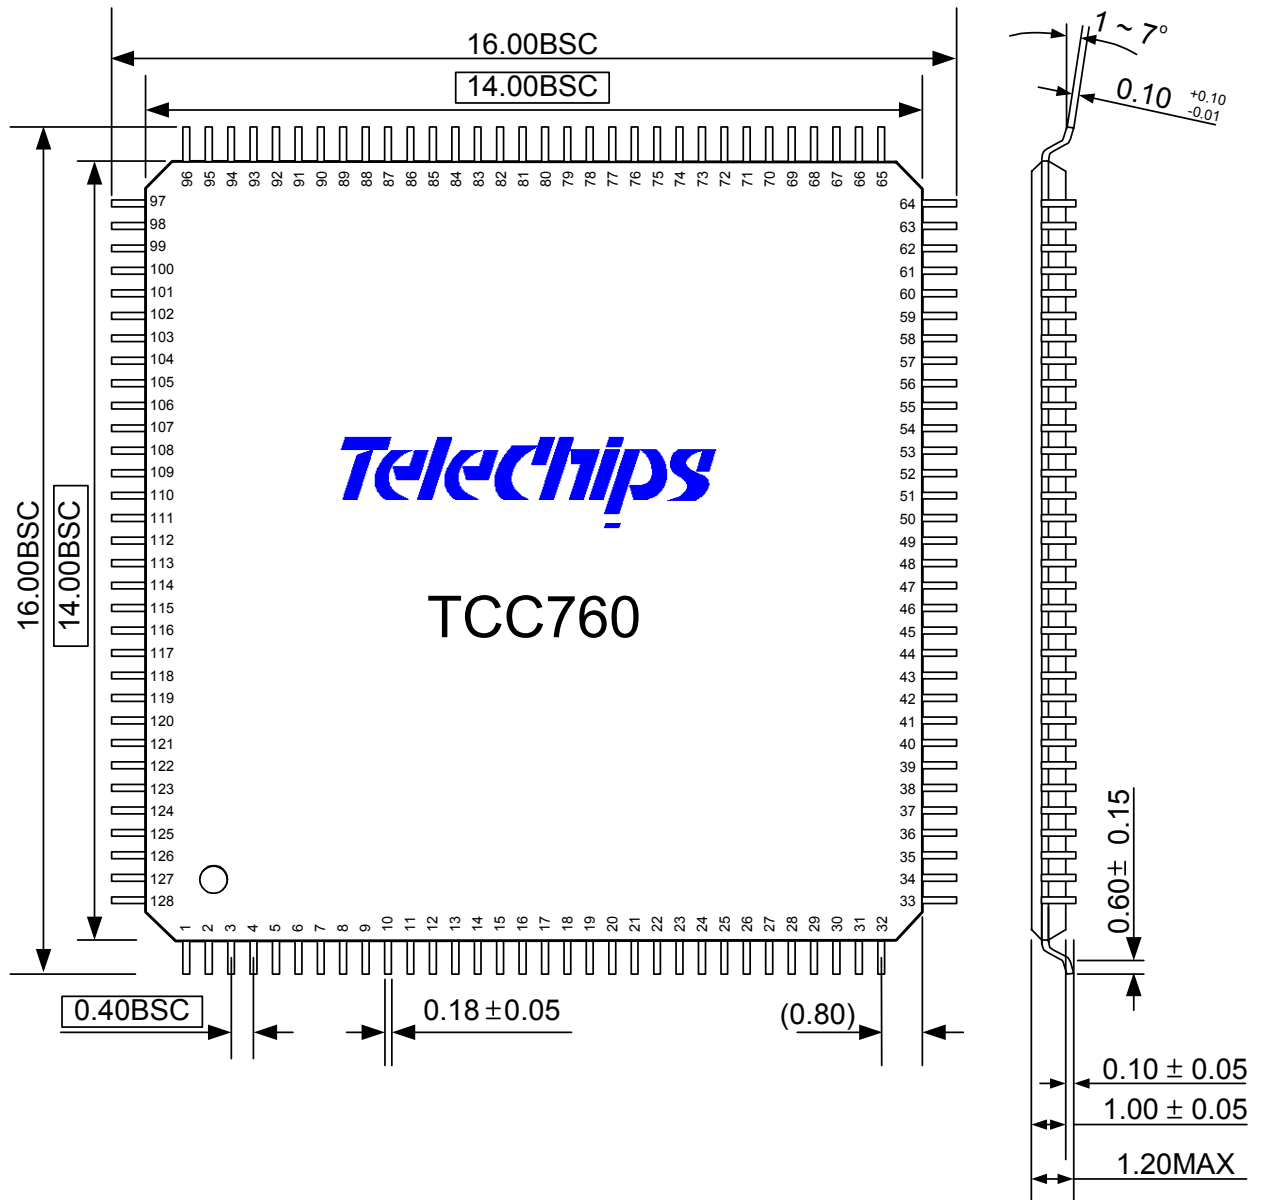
TCC760 Package Dimension (128-TQFP-1414)
